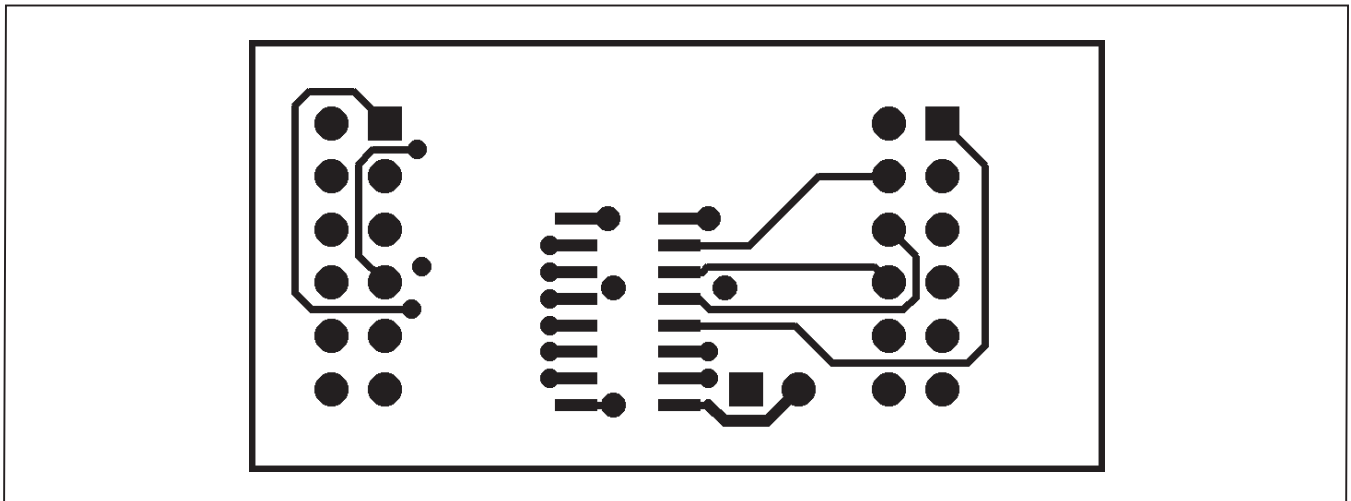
MAX14850PMB1 Peripheral Module PCB Layout—Component Side
